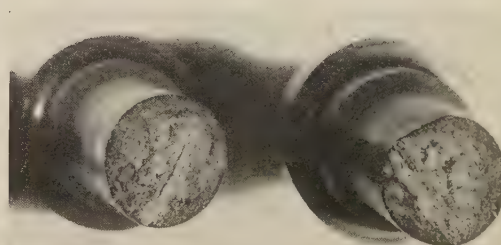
Striated Fractures in Tensile Test-Pieces. $\times 2$.
